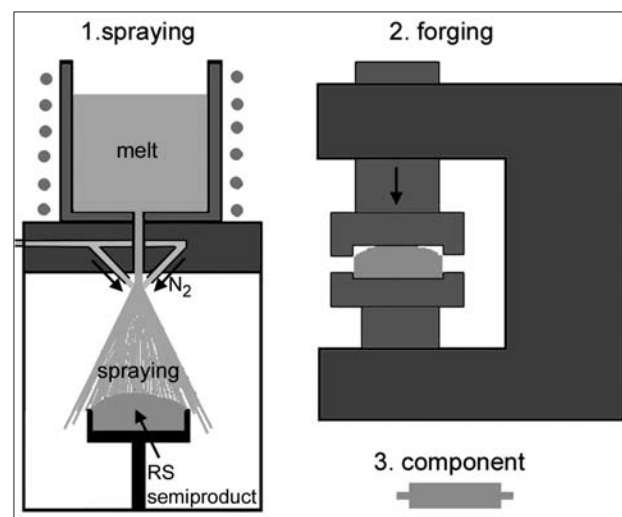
Schematic simplified drawing of melt spraying and subsequent forging.
